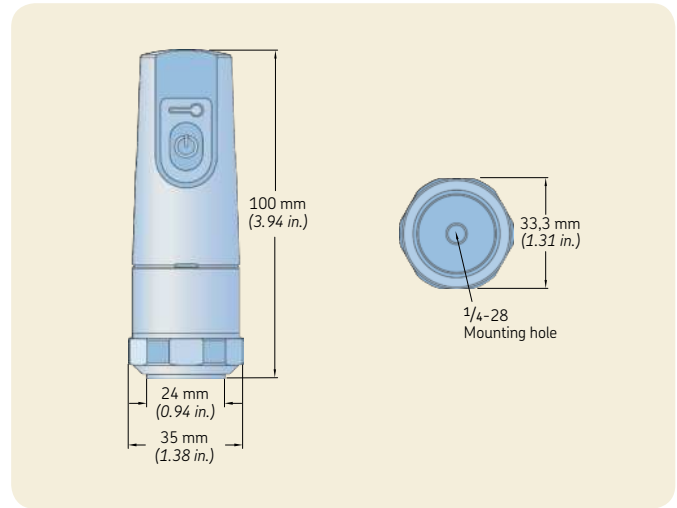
SKF Wireless Machine Condition Sensor dimensions.
